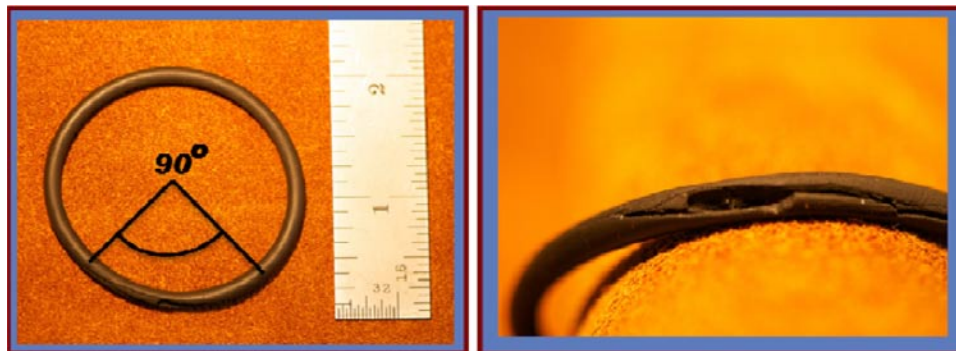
O-Ring Damage 3,000 psig Fatigue Test
